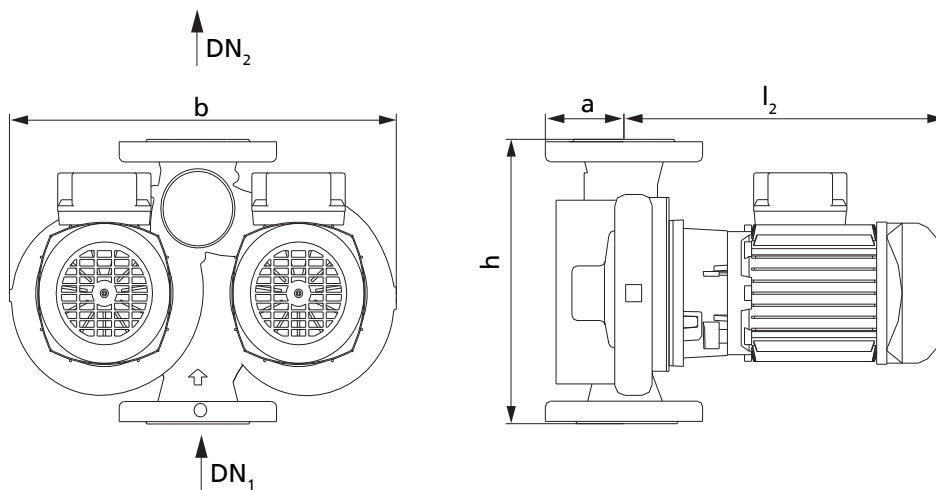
Dimensions of flanged pump set, size 032-032-100
